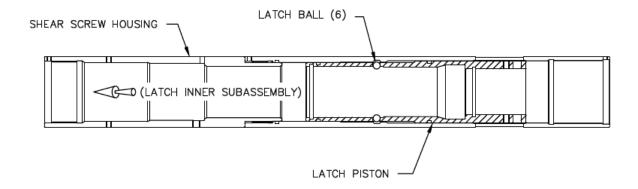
LATCH INNER SUBASSEMBLY REMOVAL
